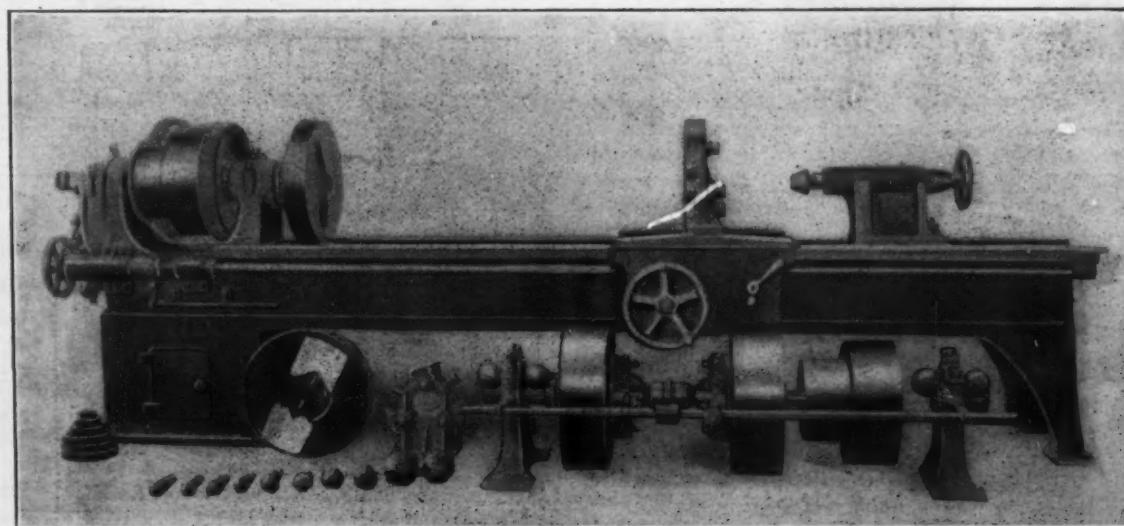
An Improved Billet Lathe Built by the Pacific Iron Works, Bridgeport, Conn.
